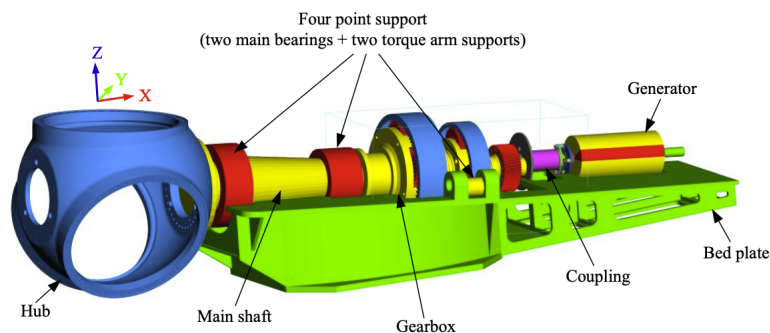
3D view of the 10-MW drivetrain MBS model with 4 point configuration -two main bearings and two torque arms- as constructed on SIMPACK in [3]
